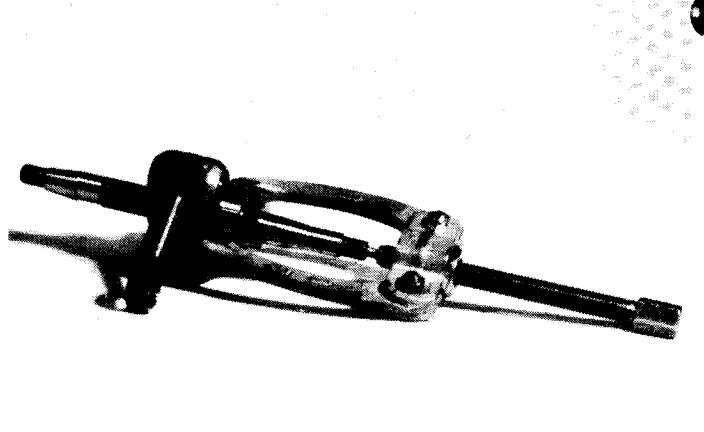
To remove the ball bearings use puller no. 9090-1.
